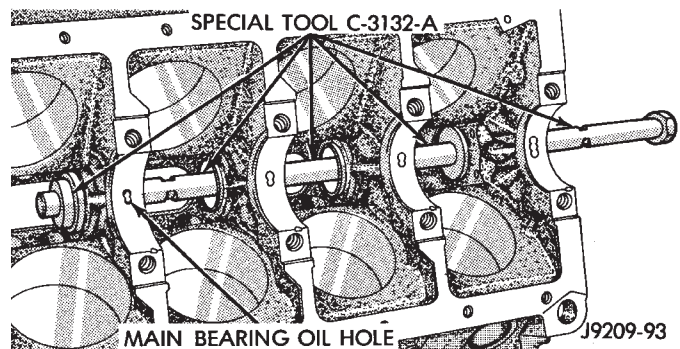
Camshaft Bearings Removal/Installation with Tool C-3132-A
